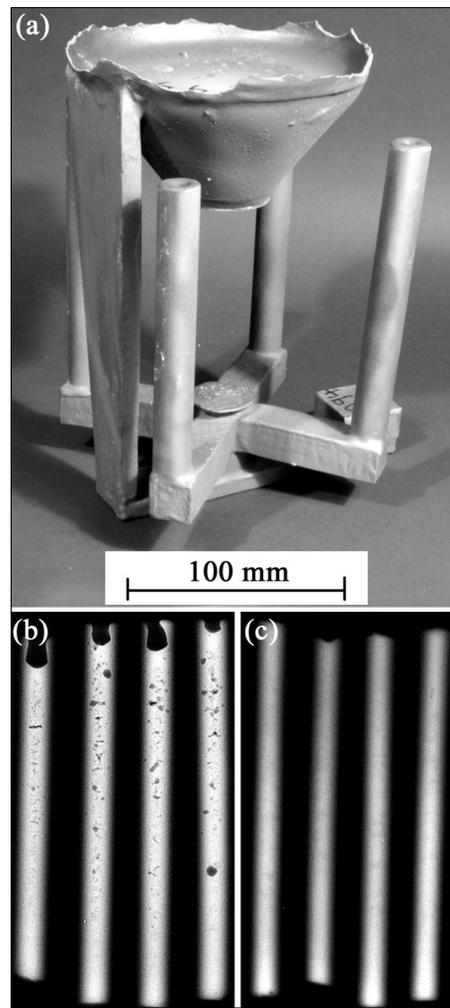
(a) Bottom-gated mould used to cast 20 mm diameter bars; (b) extensive defects – mould temperature 500 °C; (c) defect-free bars – mould temperature 1300 °C.
